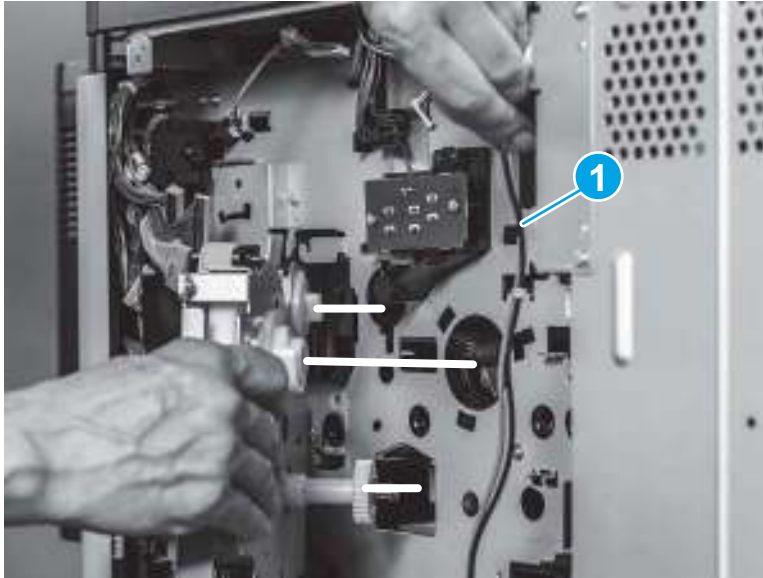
Remove the drive assembly (M830; 3 of 3)
